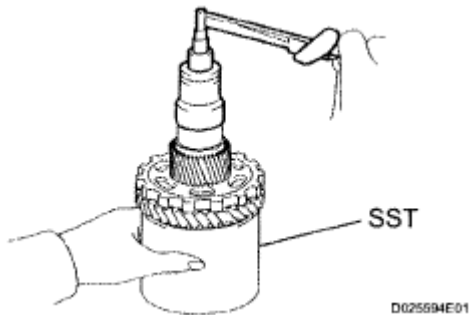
Identifying Underdrive Planetary Gear Assembly
